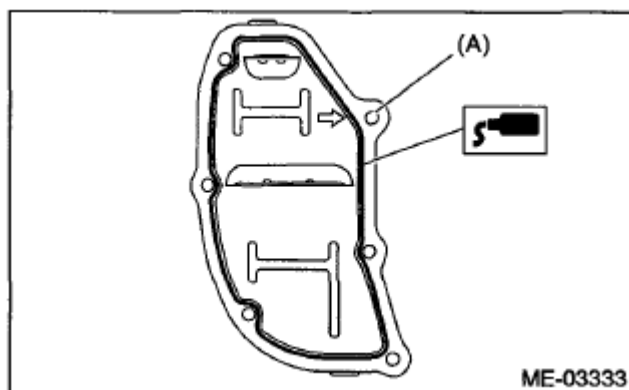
Identifying Liquid Gasket Applying Area To Mating Surface Of Oil Separator Cover And Bolt
